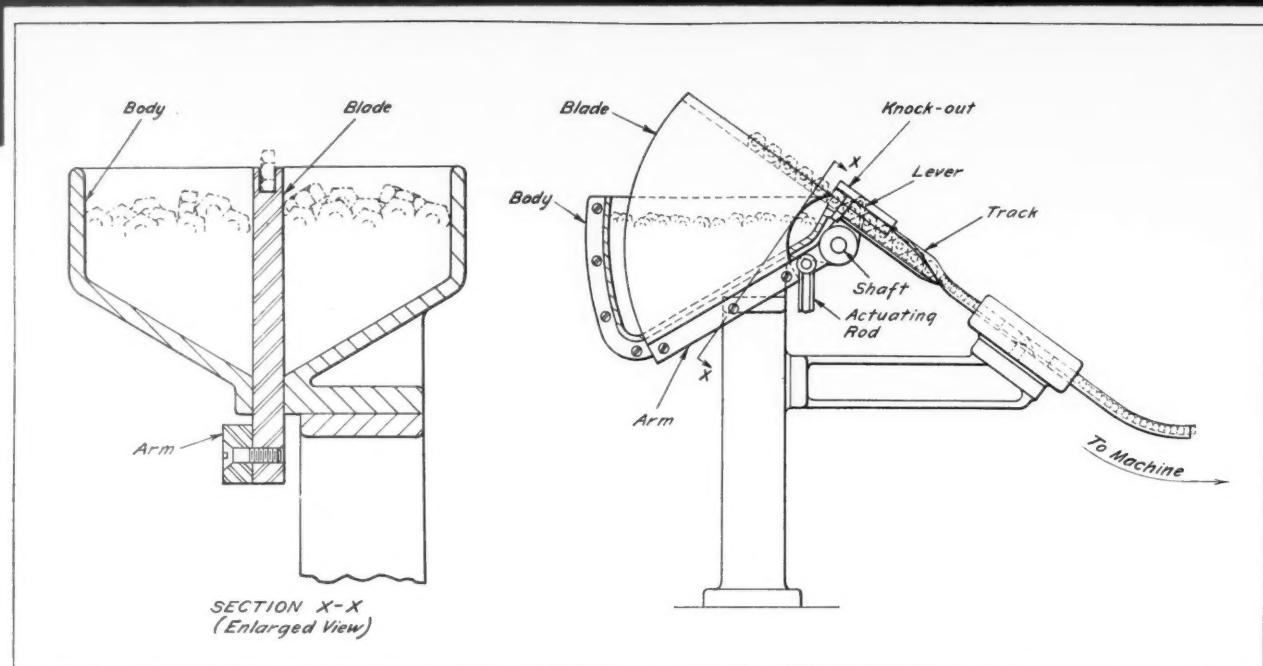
Centerboard type of hopper and separator mechanism for feeding properly positioned nuts to an automatic machine
